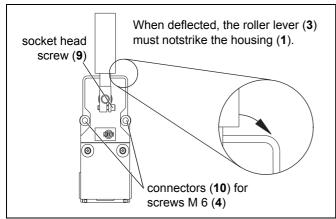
Installing the misalignment switch on the conveyor belt
